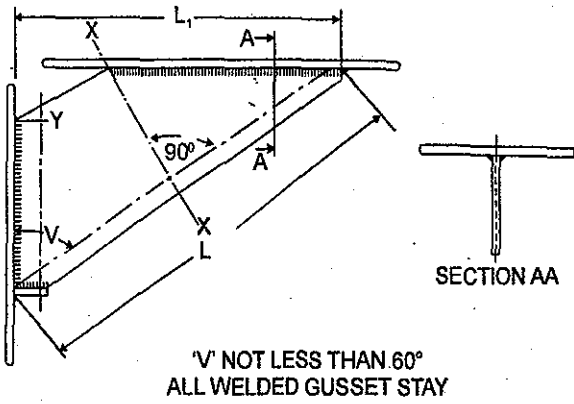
TYPICAL DETAILS FOR ALL-WELDED GUSSET STAY
